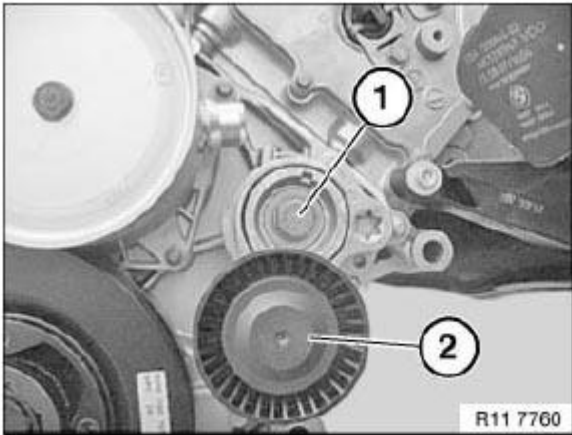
Identifying Belt Tensioner With Idler Pulley
